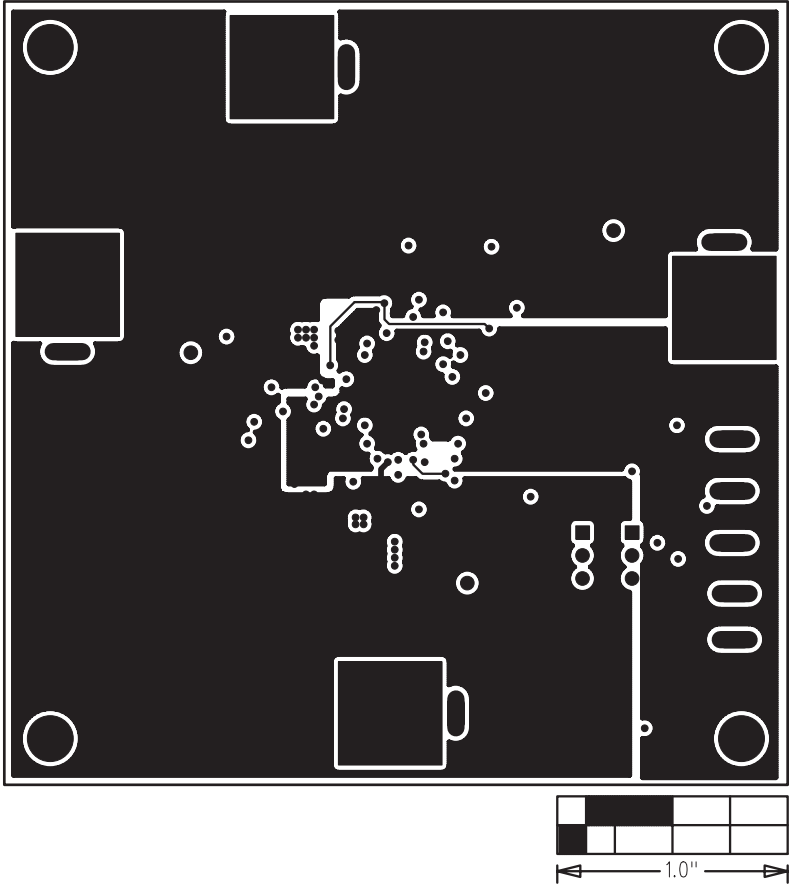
MAX15003 EV Kit PCB Layout—Layer 2 (Ground Layer)
